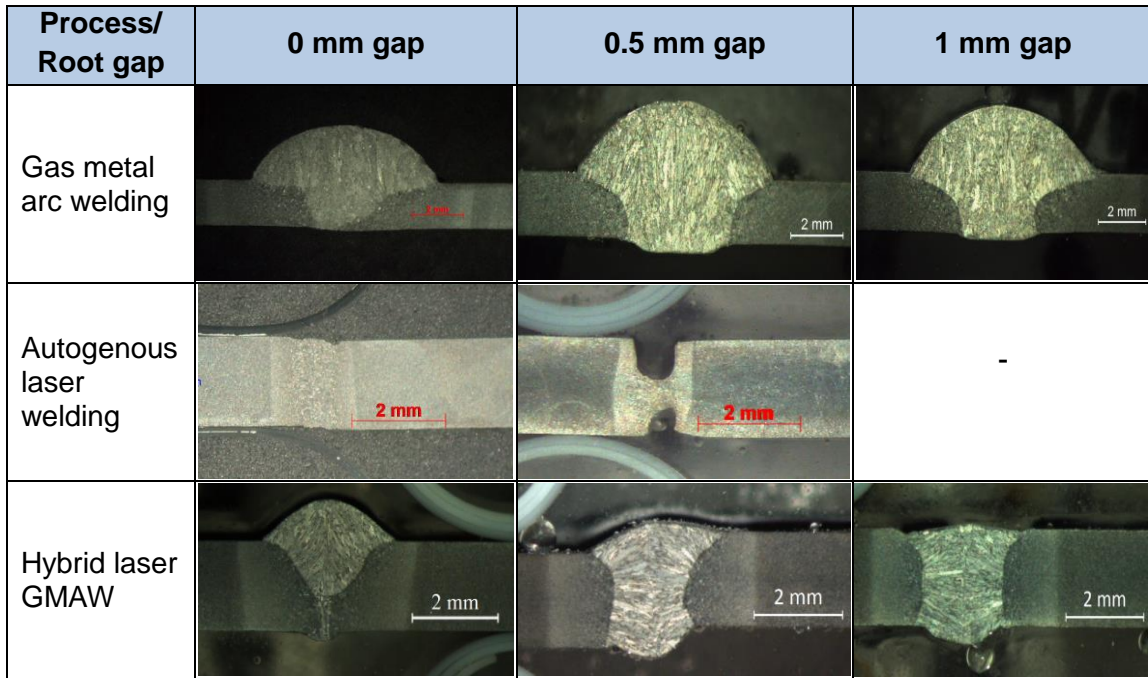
Weld cross-sections of different welding processes at different root gap conditions - 2 mm thickness
